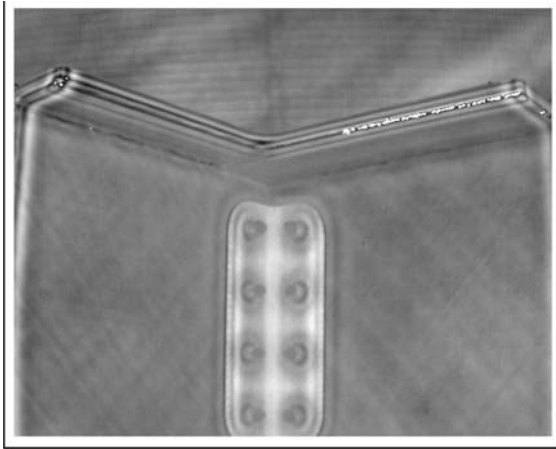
Thermal inspection results for cruciform 1, rivet 3 top.
